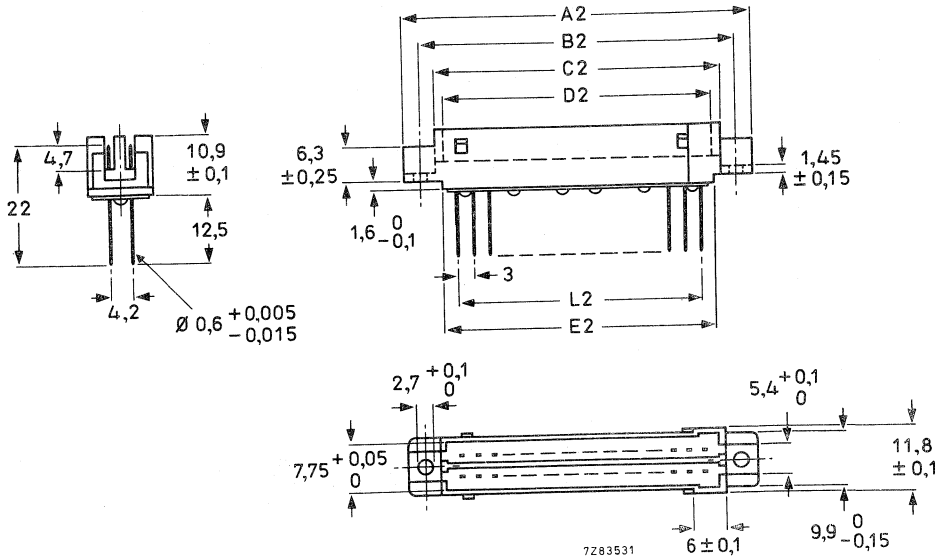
Male part with pins for wire wrapping; see Table 2 for dimensions A2, B2, C2, D2, E2 and L2.
